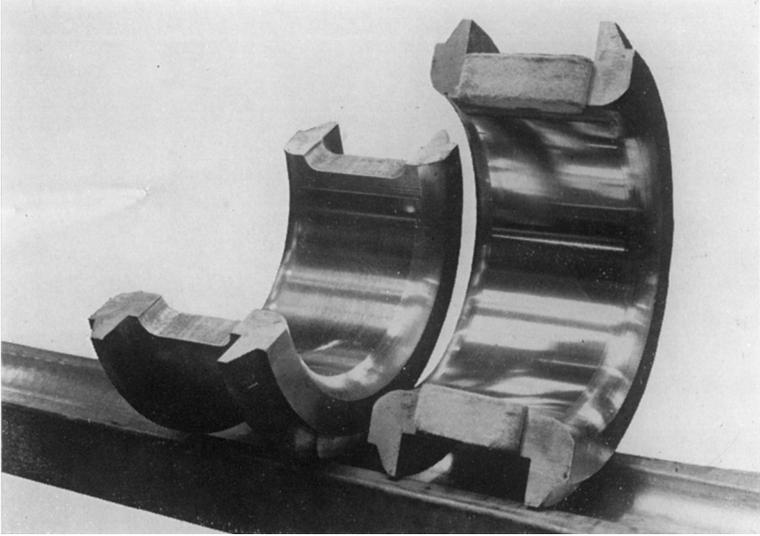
Gresley marine type brasses with complete whitmetal bearing surface and felt pads.
